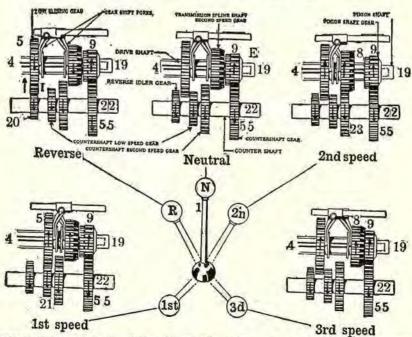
First speed: The drive is from (19) to (9), to (55), to (21), to (5), to the transmission square shaft (4), to the rear axle. (Arrows on the gears indicate the direction in which the gears turn.)
